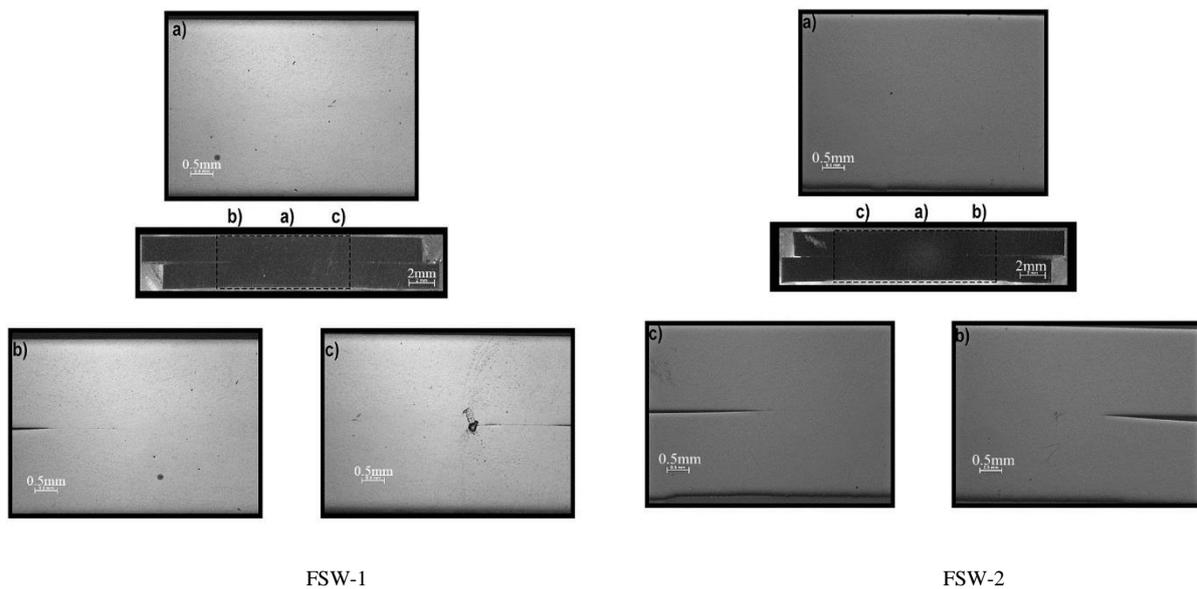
Macroscopic and microscopic figures of FSW-1 and FSW-2 weld cross section; a) center of the weld, b) retreating side and c) advancing side.
